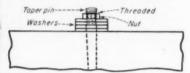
Taper pins can be quickly and easily removed by using the pressure of a nut against some washers placed over the threaded pin end.
